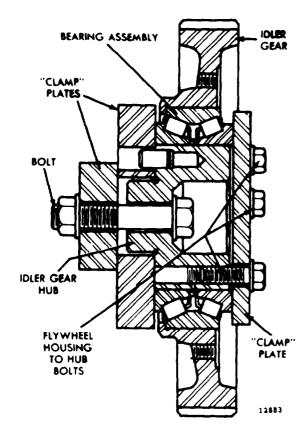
B-165. Fixture for Testing Bearing Pre-Load
